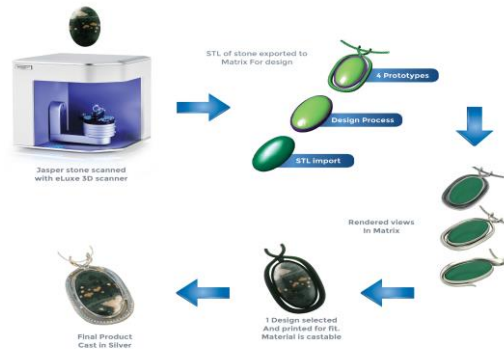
3D jewelry scanning and printing workflow using a 3D printer and casting
